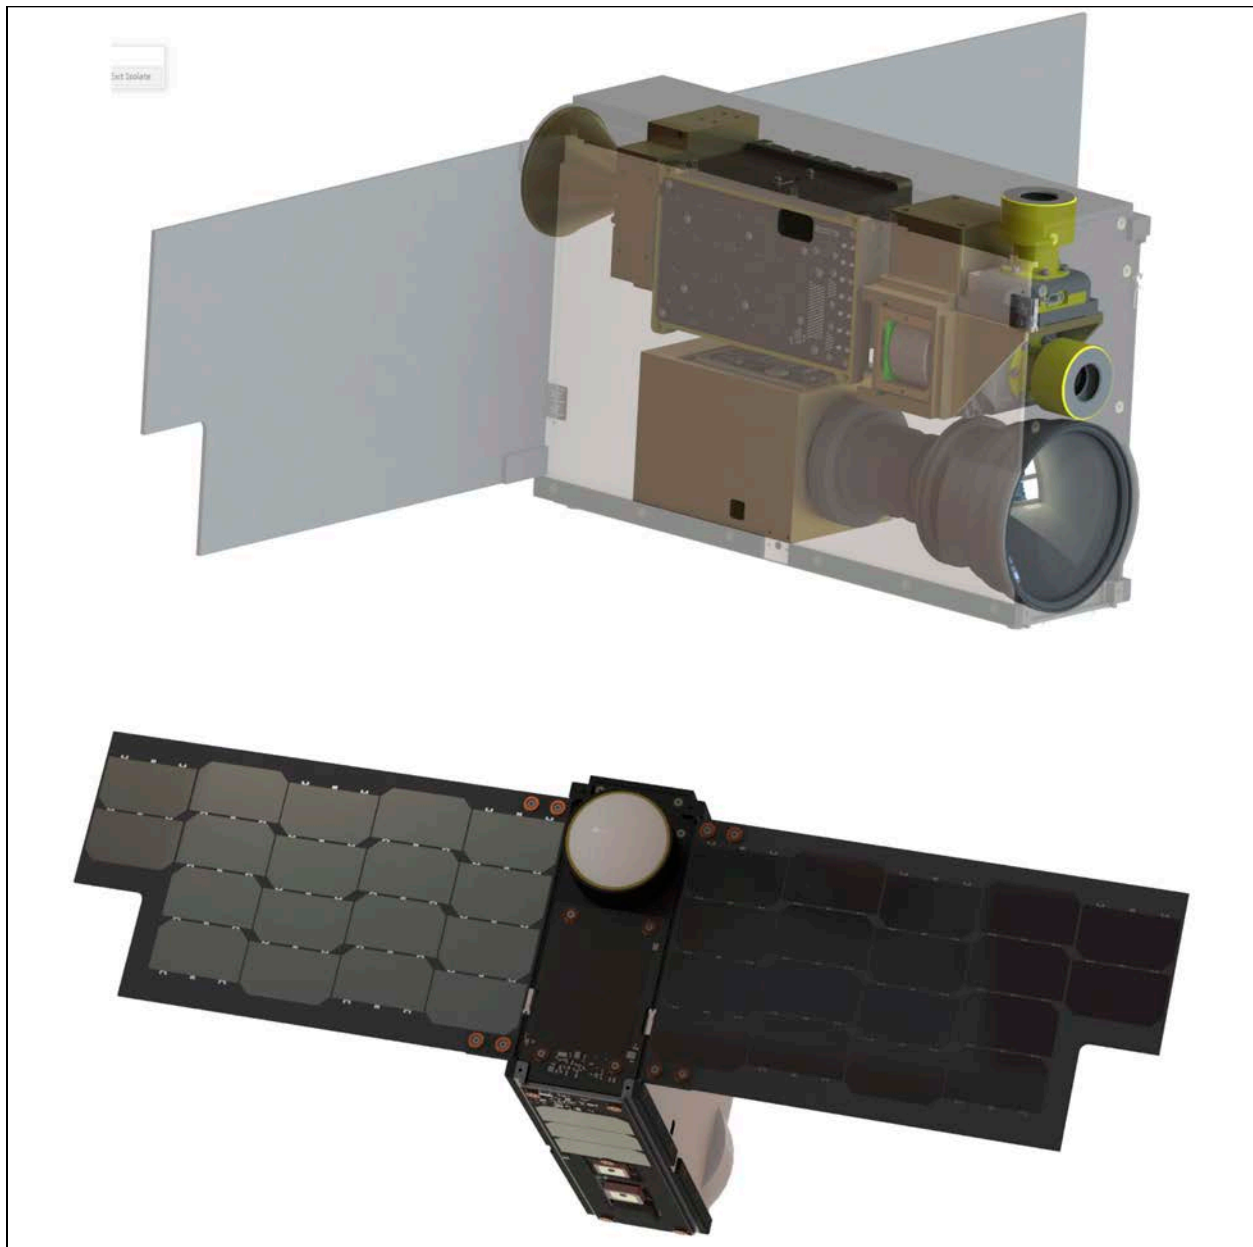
CAD Views of the Sutter Demo Spacecraft. Deployed
